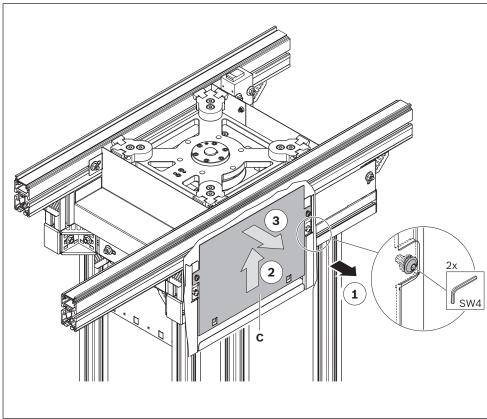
Opening the inspection openings (here size 2 180° for WT 2, WT 2/F)
